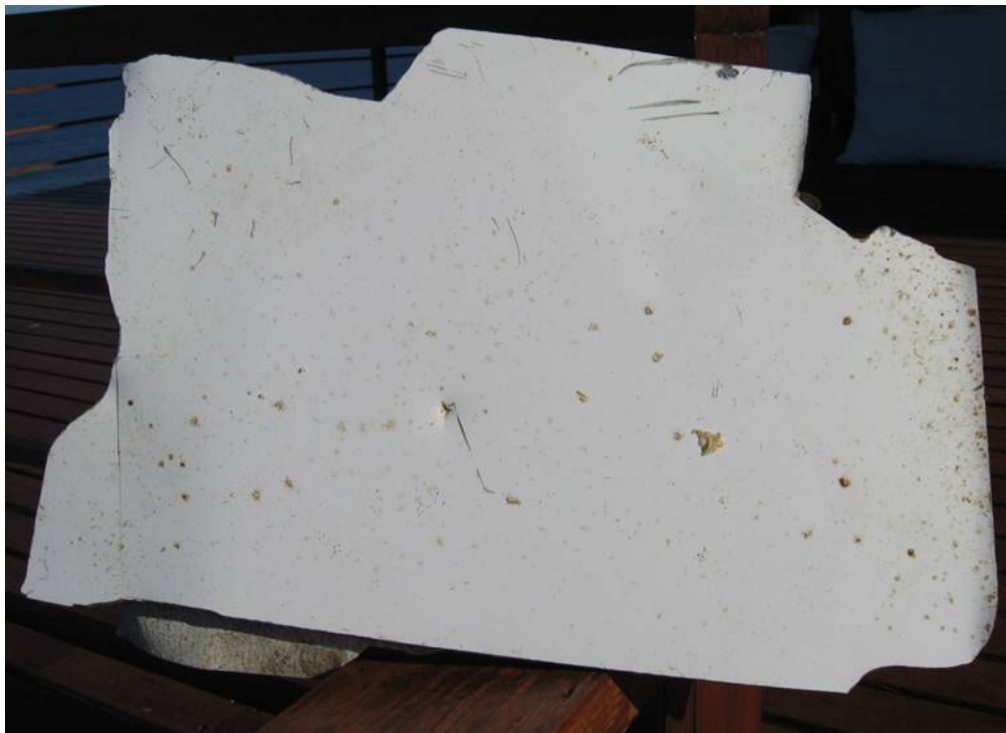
Panel Debris showing cuts, scratches and pitting damage.
